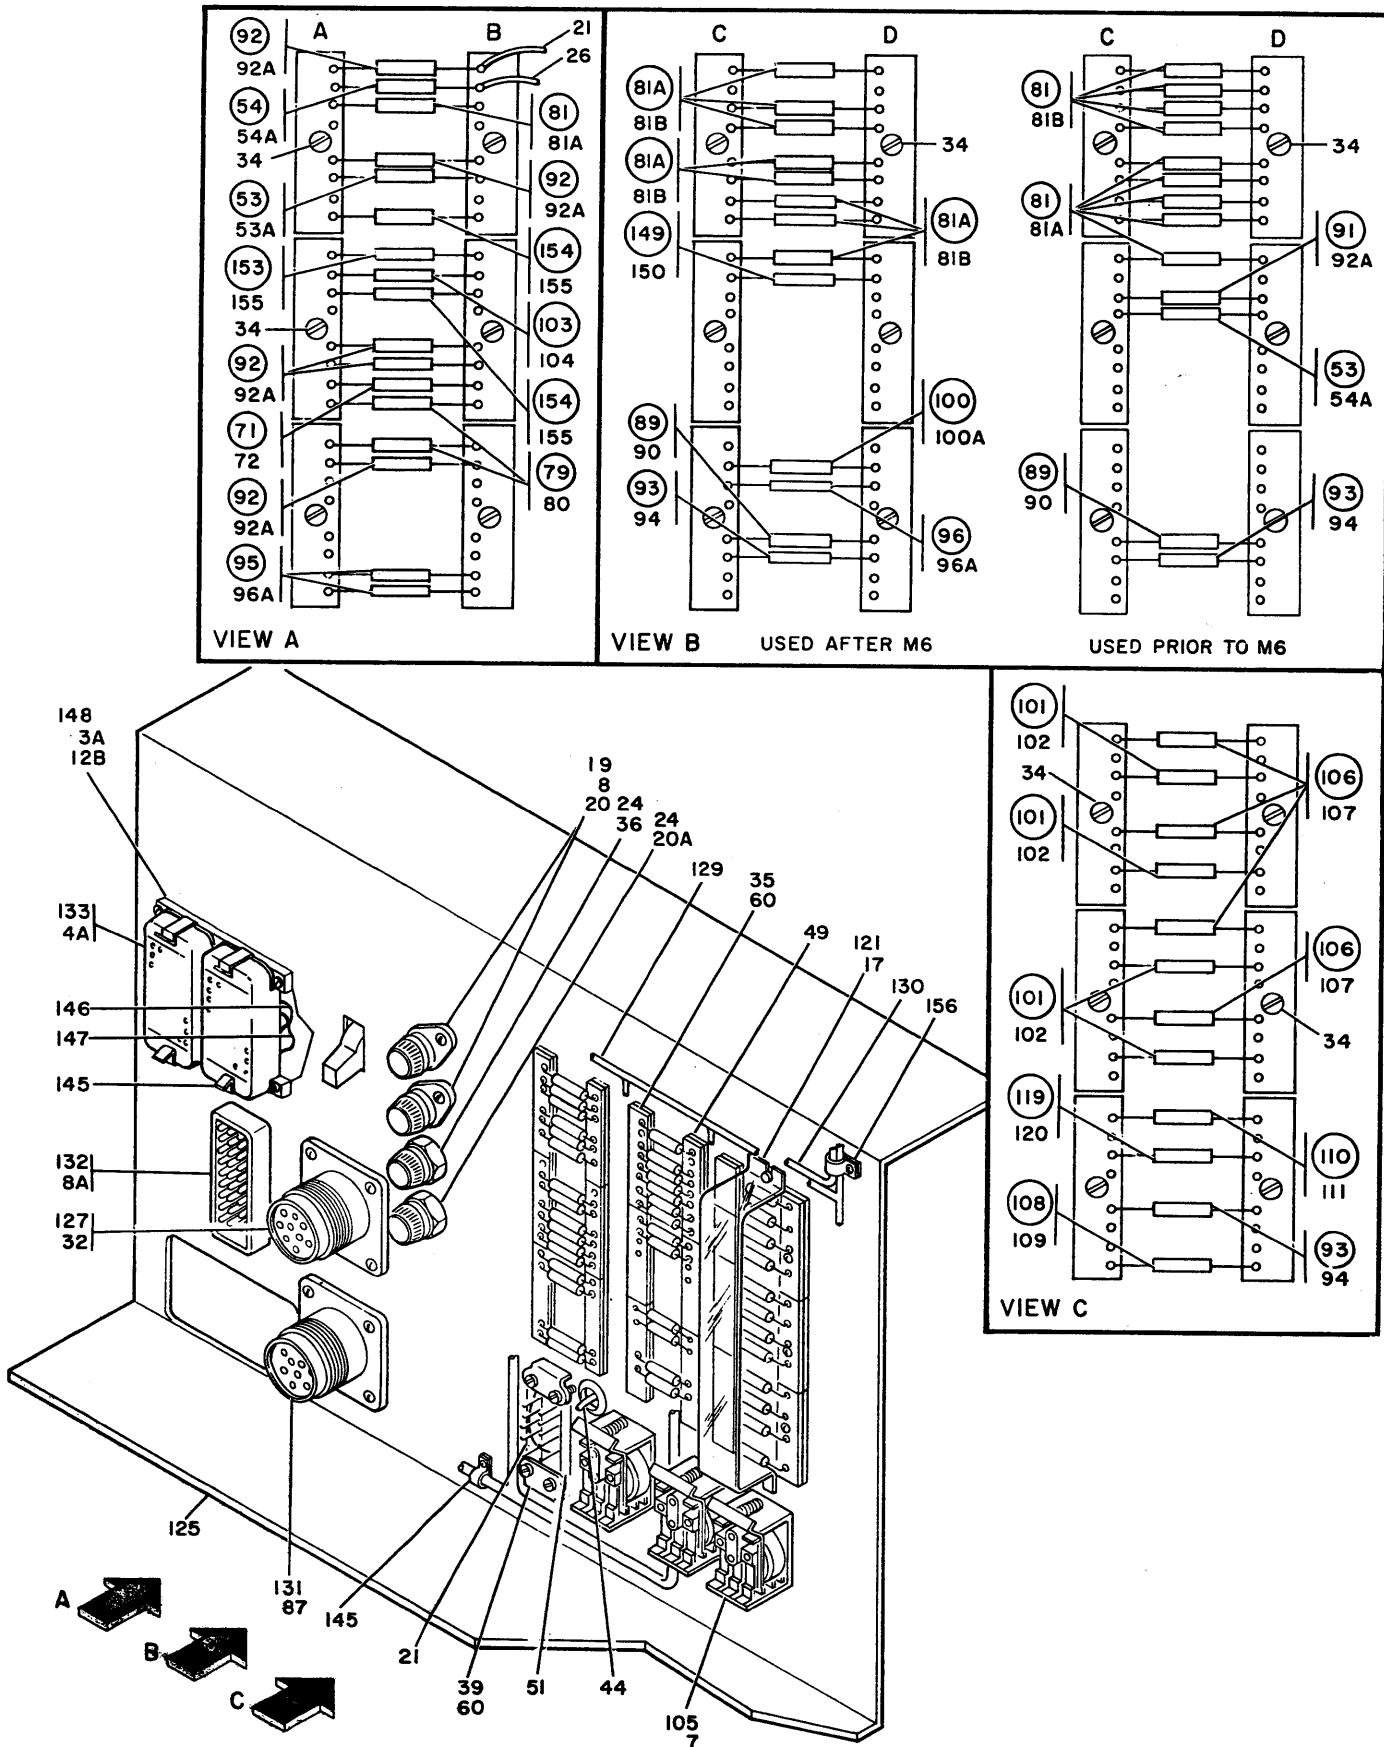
SEQUENCE PANEL ASSEMBLY. SHEET 2 OF 2. SEE LIST 16.
